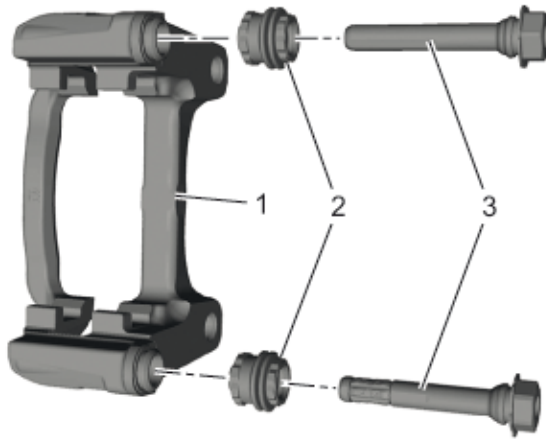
Brake Caliper Guide Pins, Boots And Caliper Mounting Bracket
